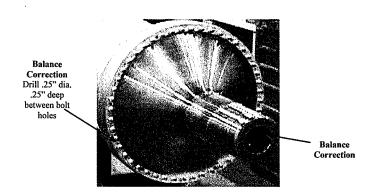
Weight Removal Location for Forward Sub Assembly Balance
